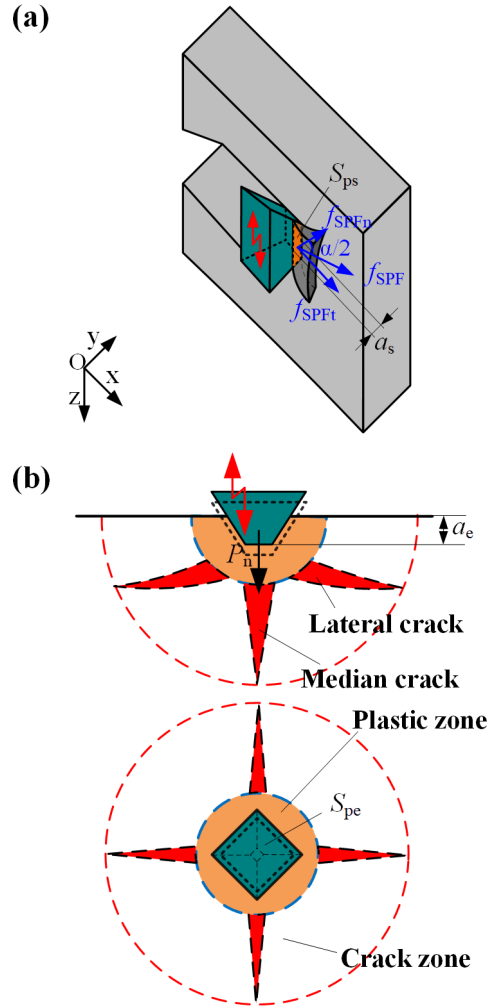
Particle fracture force of (a)side grit; (b) bottom grit
